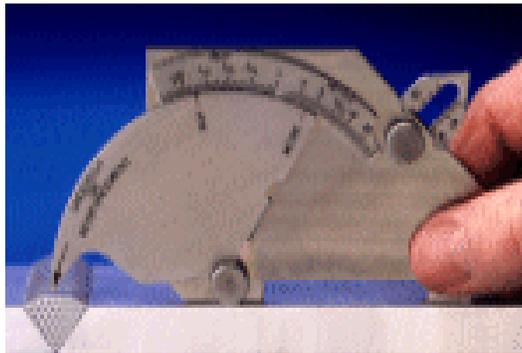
Tool for Measuring Weld Reinforcement Height and/or Plate Alignment and Fillet Weld Leg Size
